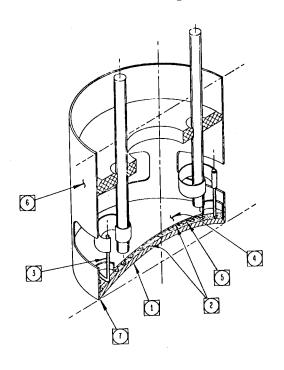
Cathode - Heater Assembly (Hard Potting Design)
